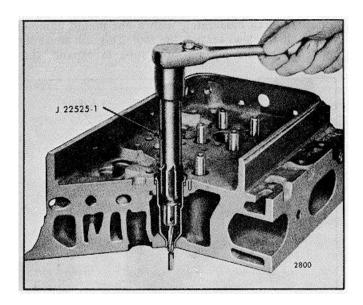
Reaming Injector Tube for Injector Body Nut and Spray Tip
